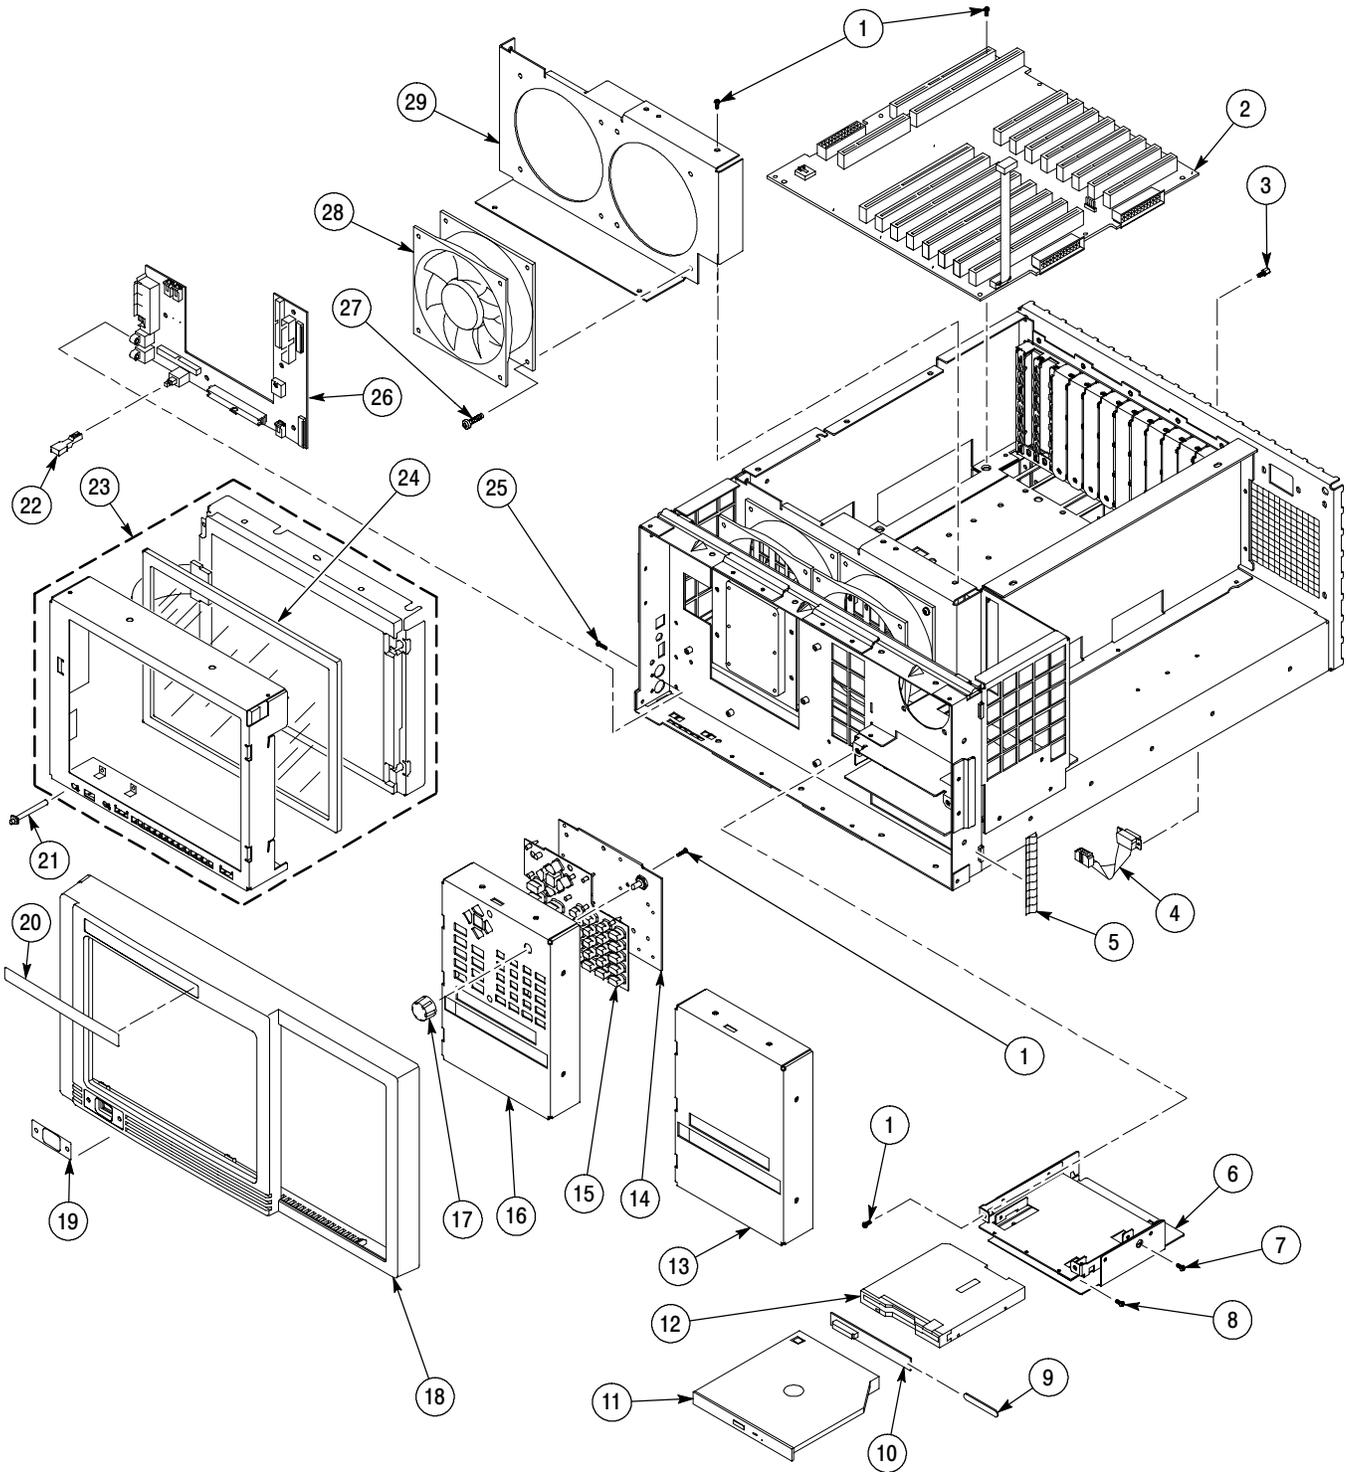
Front panel and associated parts, Backplane board, and disk drives
